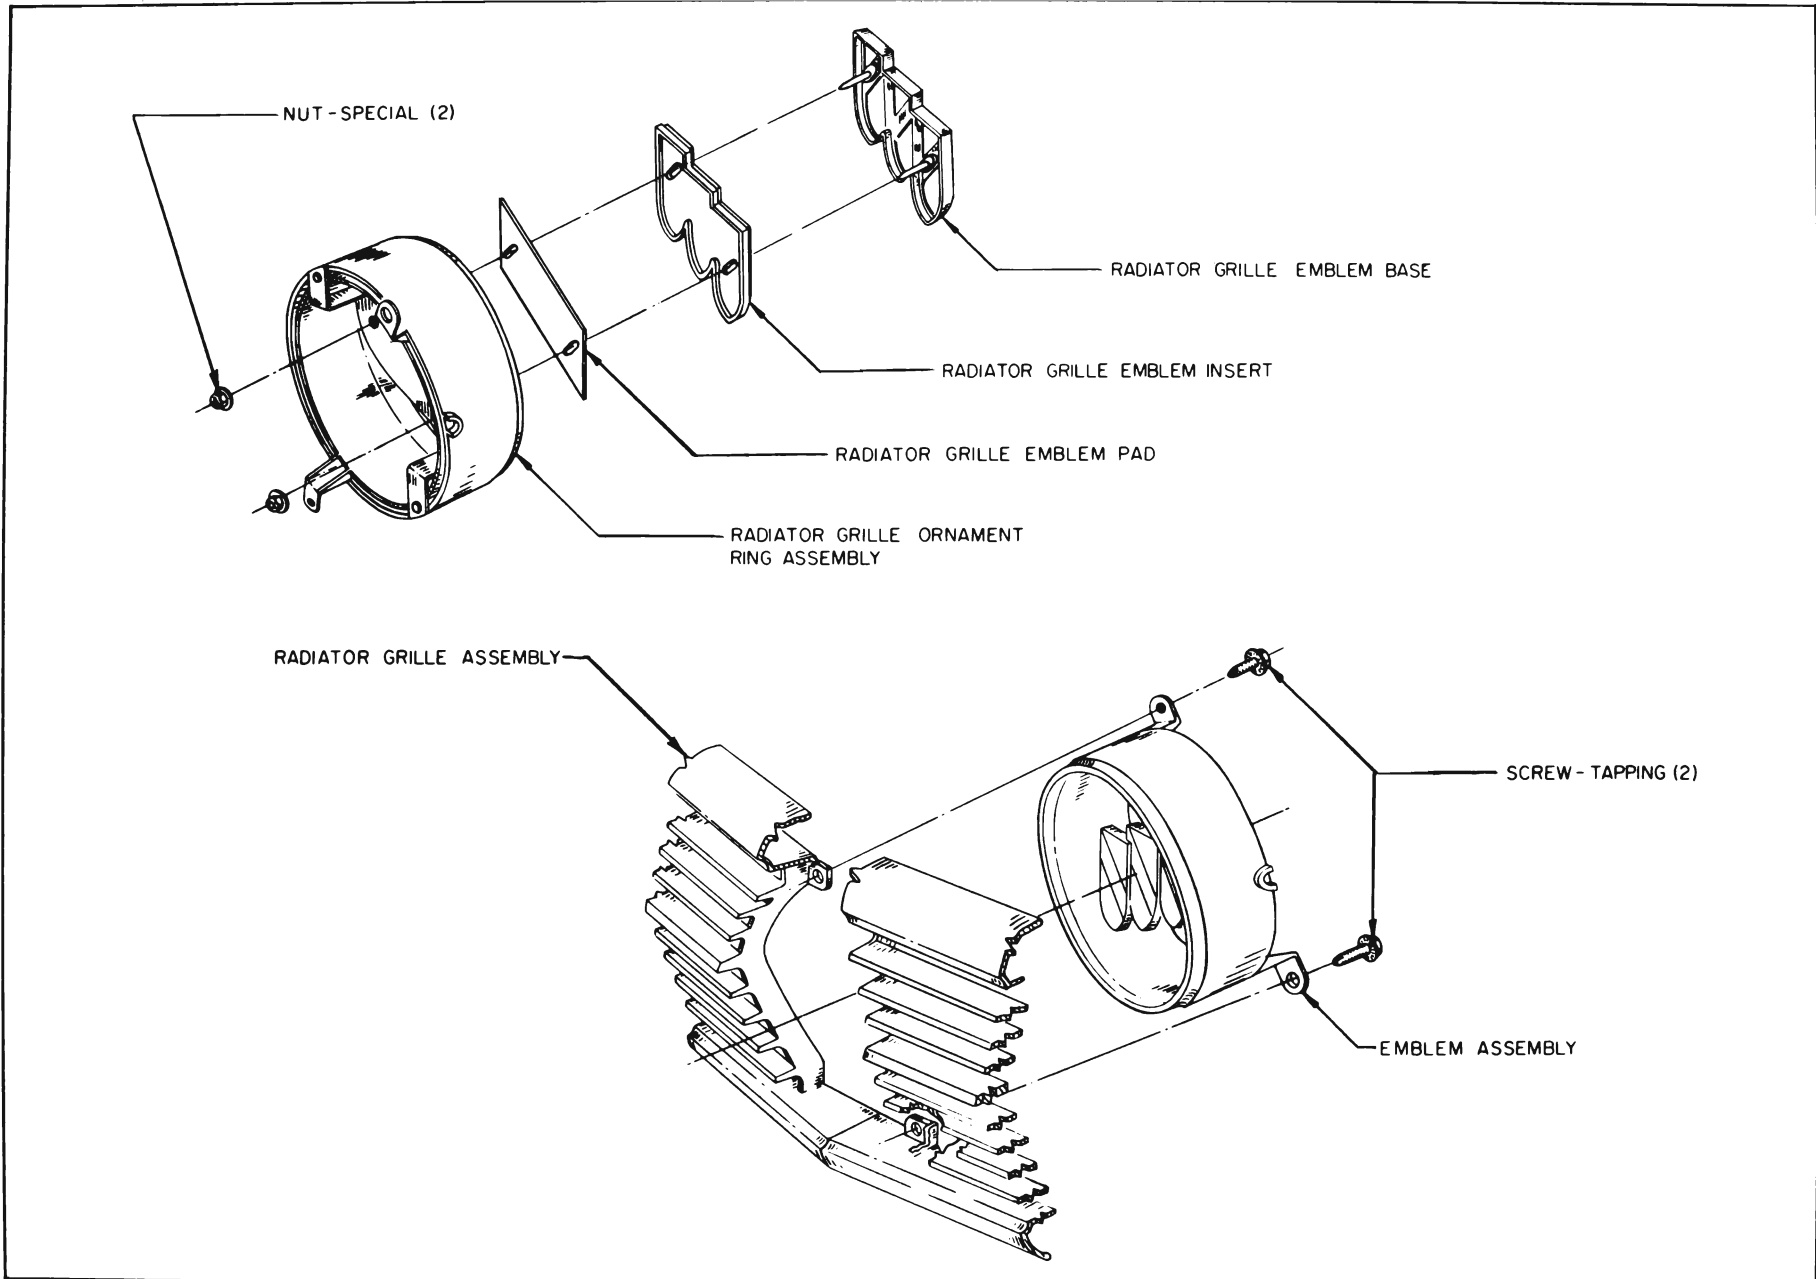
Grille and Front End Sheet Metal Illustration #3
